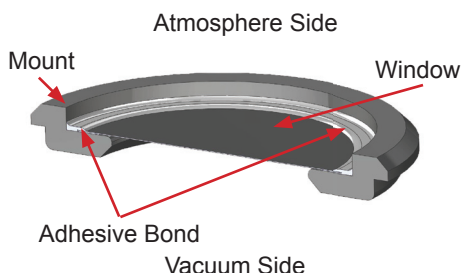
Typical Epoxy Adhesive Attachment of Beryllium Window
